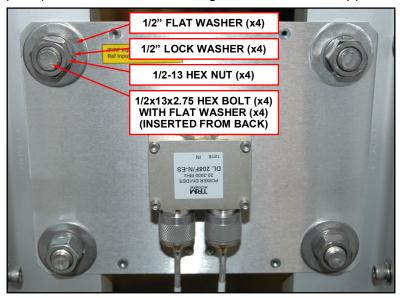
Mount Input Plate Assembly to Frame (C-, Ku-Band)
